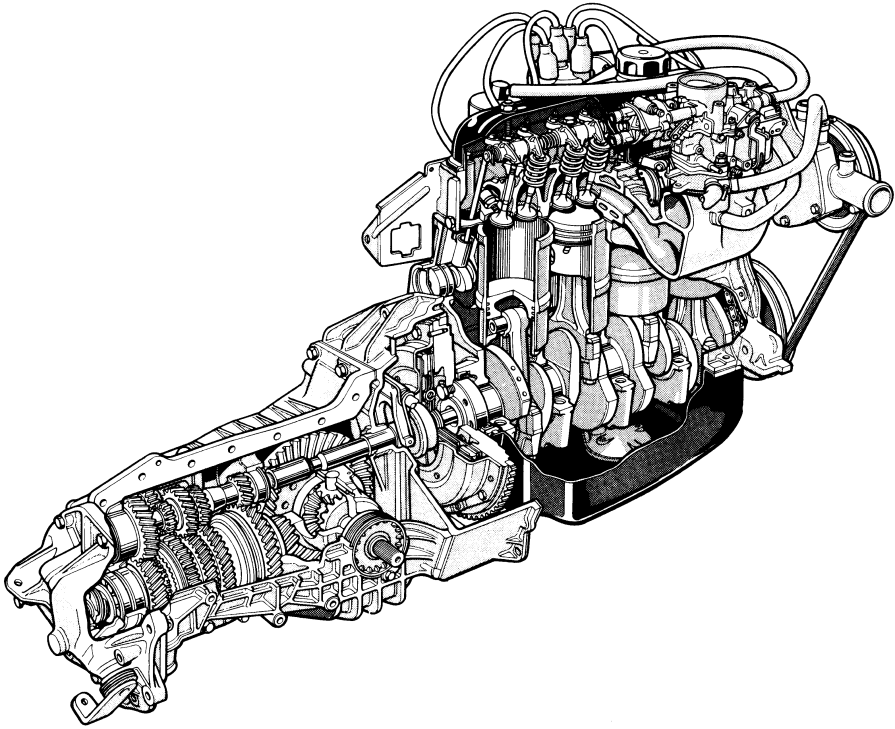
In front-wheel drive vehicles the engine can be mounted longitudinally in front of the front axle with the manual gearbox behind. The shaft goes over the transverse differential (illustration: Renault).
